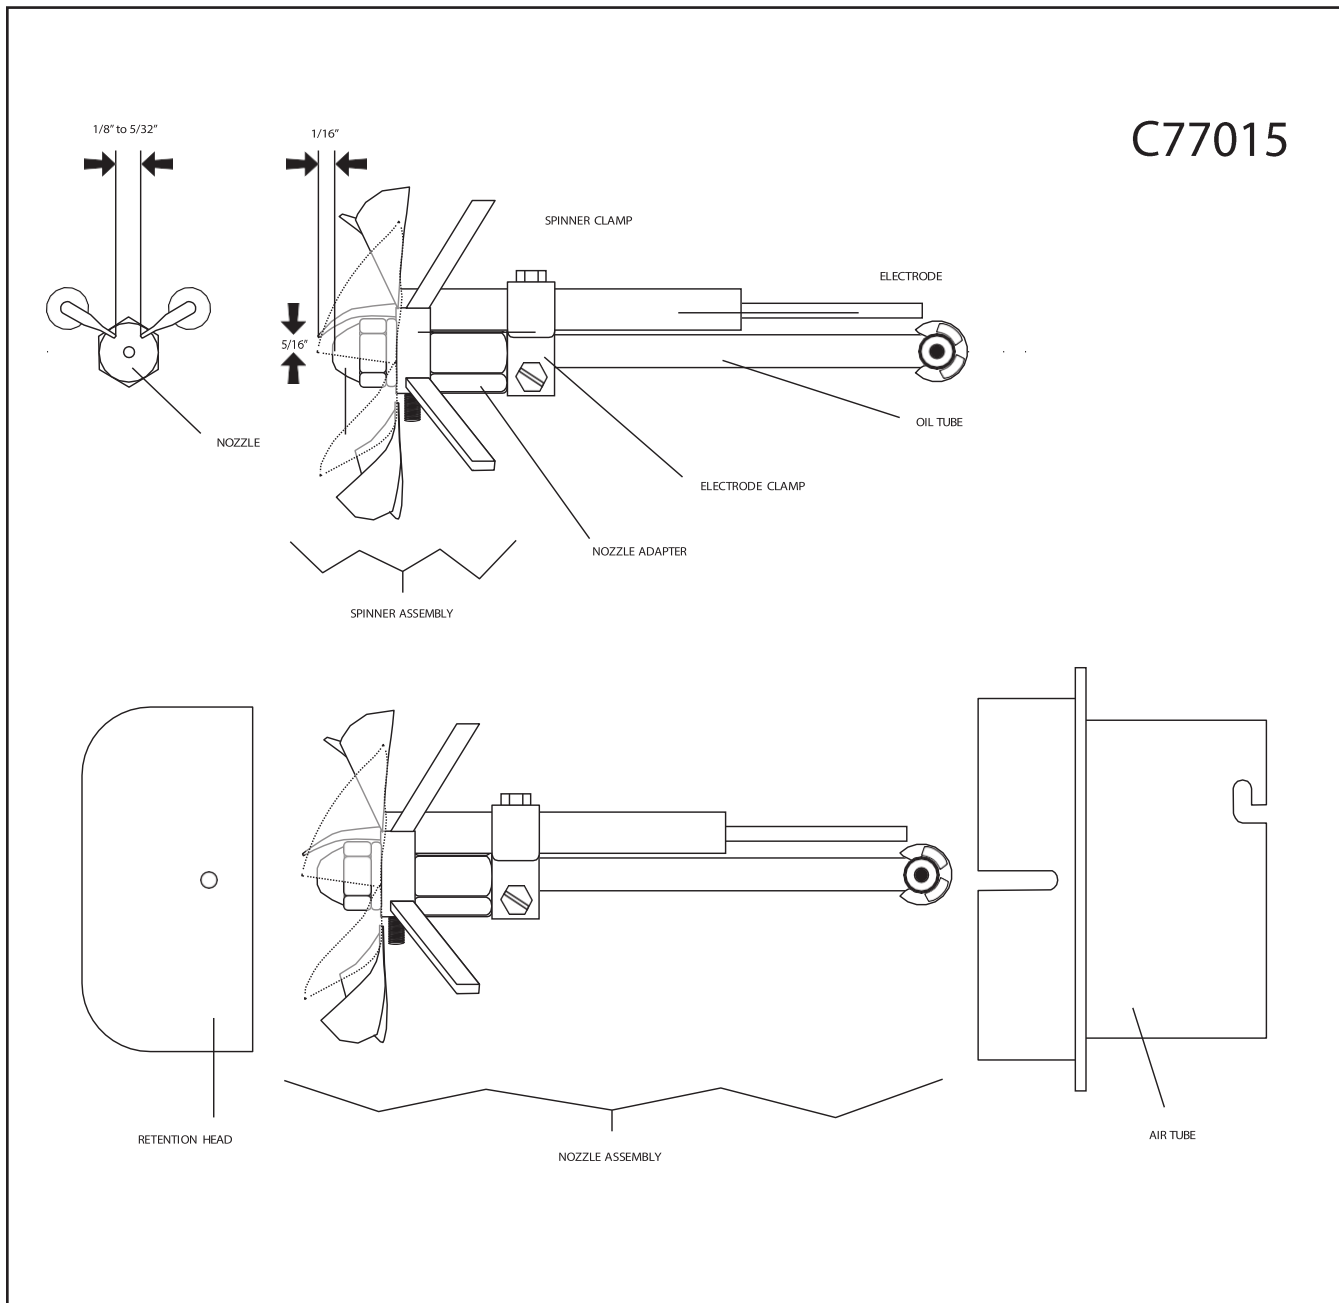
B: INSERTING / REMOVING NOZZLE HEAD ASSEMBLY
